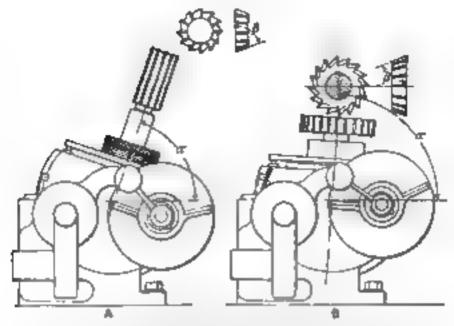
A Dividing head set for mining teeth of end mill B. Dividing head set to mill the inde teeth of a side milling cutter.
